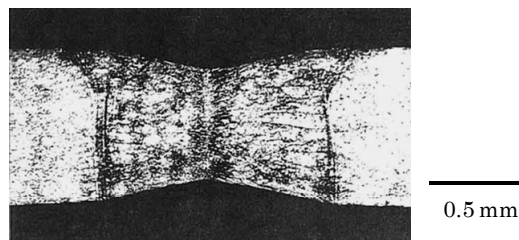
Example of cross section of weld bead with groove width of 0.6 mm.
